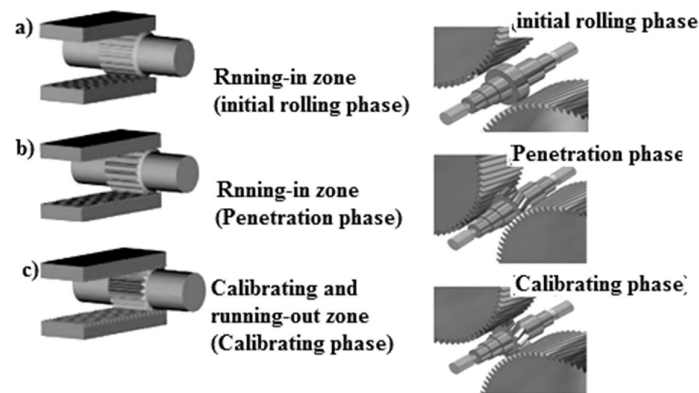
Rolling of gears by flat rolling or stepped rolling
